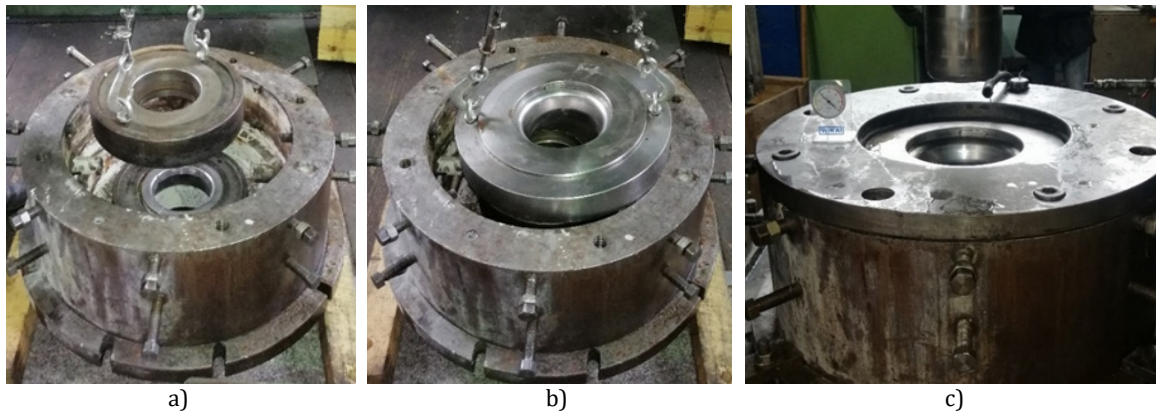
Assembly of the lower deep drawing tool with reinforcing rings: a) lower die b) upper die c) assembly
